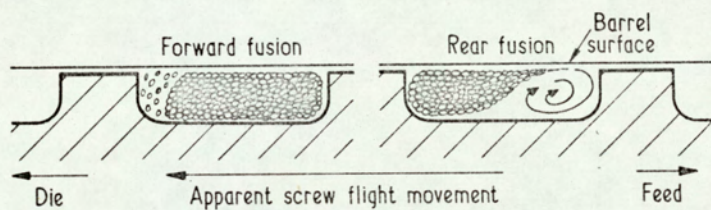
Cross channel view of rear and forward fusion mechanisms.
